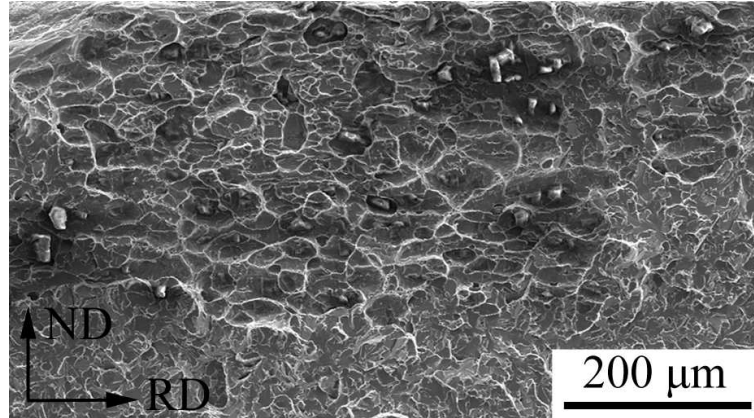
Fracture surface at weld junction after post-weld heat treatment from the pipe with 8.6 mm wall-thickness, tested at -40°C .
